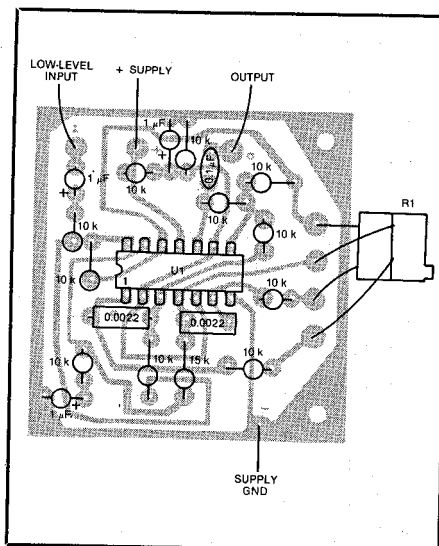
A parts-placement diagram, shown from the component side of the board. Gray areas show an X-ray view of the copper pattern.
